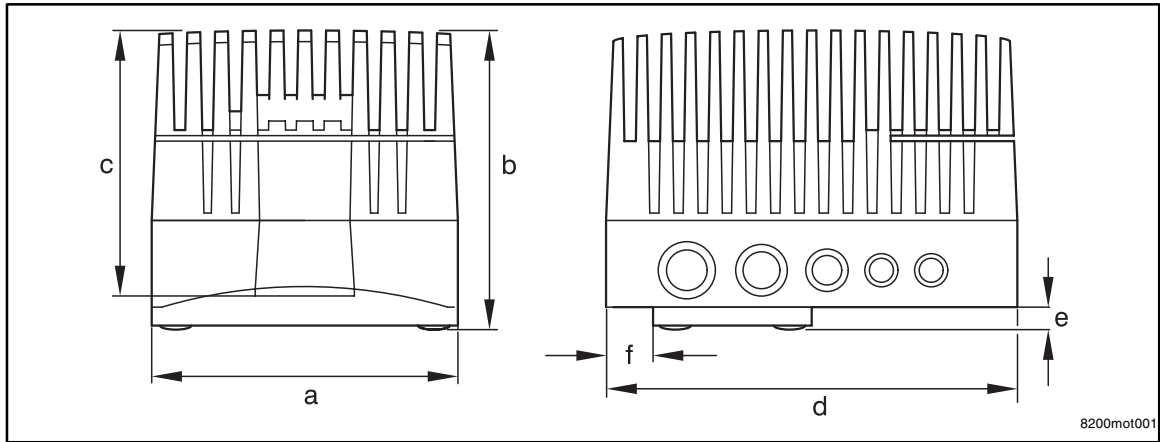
Dimensions 0.25 ... 2.2 kW
